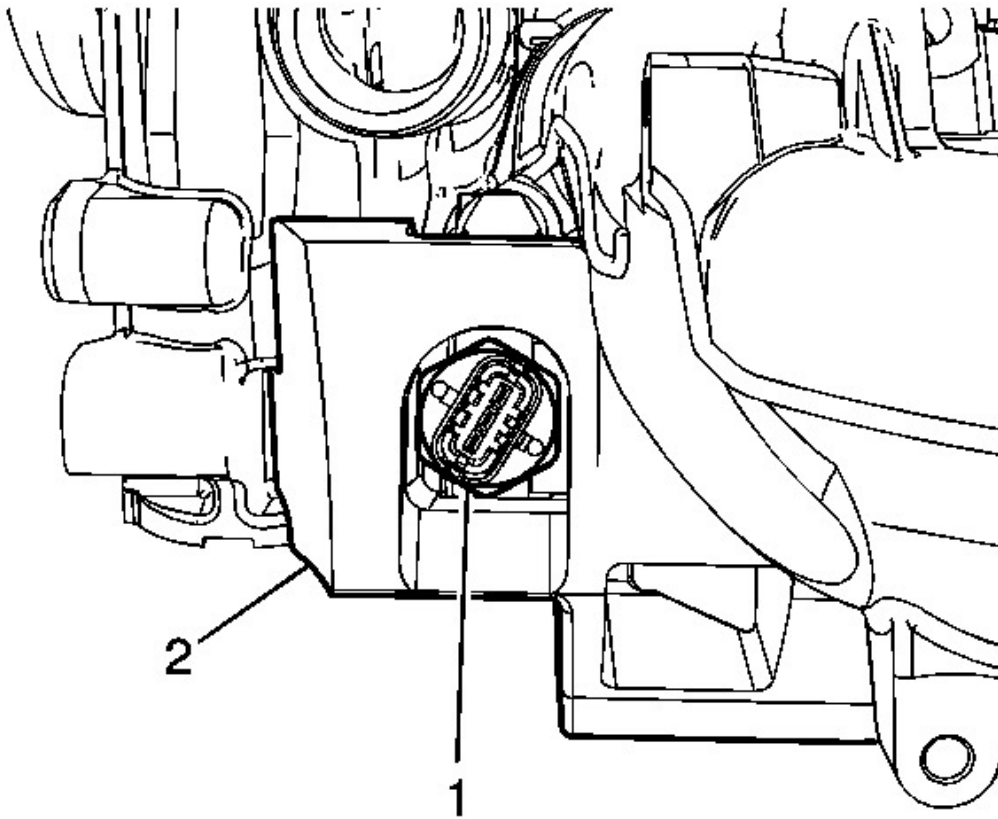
Fuel Rail Fuel Pressure Sensor And Foam Insulator
